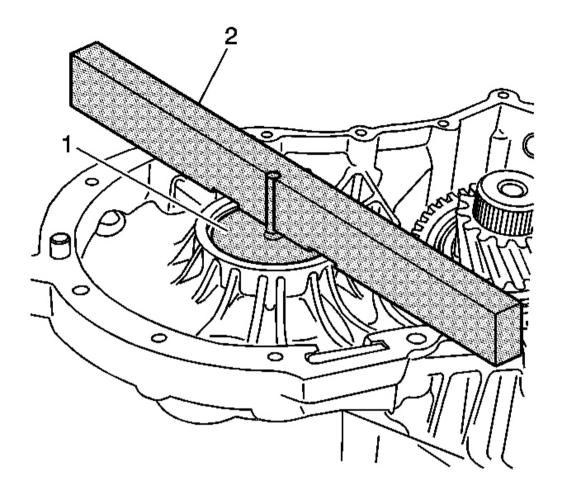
Gage Rod, J 44388-1 & J 44388-2 Courtesy of GENERAL MOTORS CORP.
